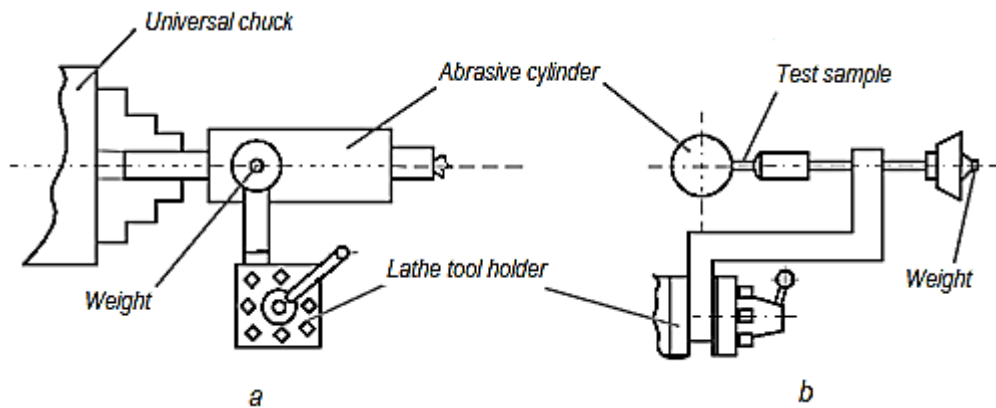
Abrasive erosion test device adaptable to a universal lathe
